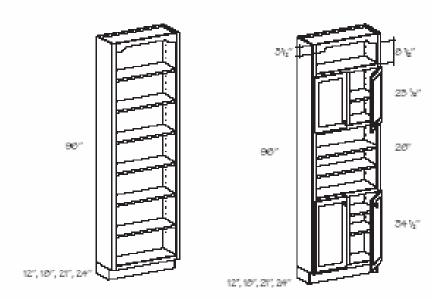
Merillat cabinet wall components: bookshelf (left) and furniture base and wall 96" (right) (<u>www.merrilat.com</u>)
